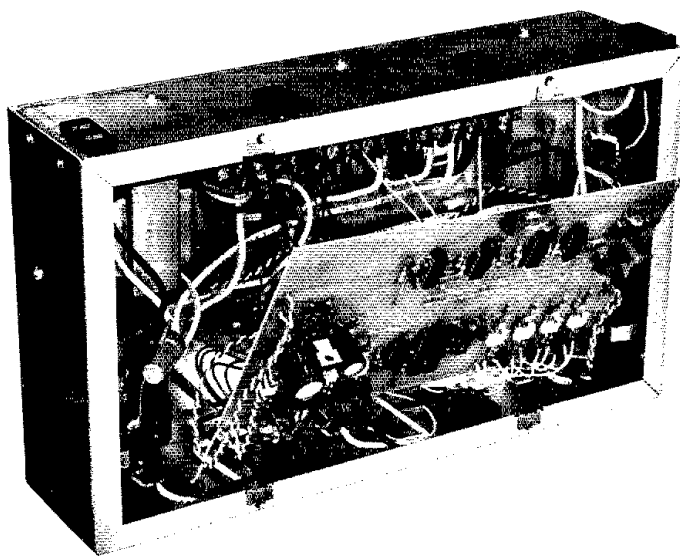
An inside view of the controller with the PC board partially removed. An early version of the FAR Circuits board is used in this prototype. Beneath the line-cord entry point at the lower-left corner of the chassis is a battery holder containing three AA cells (BT1). T1 is above that. The ac outlets (J1-J7) are mounted around the perimeter of the enclosure. The larger two of these are three-terminal sockets (equipped with a safety ground); the others are two-terminal sockets. (I used these because I had them on hand.) Between the outlets, secured to the inside wall of the case, are the triacs. One of the two double-row barrier terminal strips used for making interconnections between the PC board and the off-board components can be seen above the PC board. In position, the board is supported by 1-inch standoffs.
